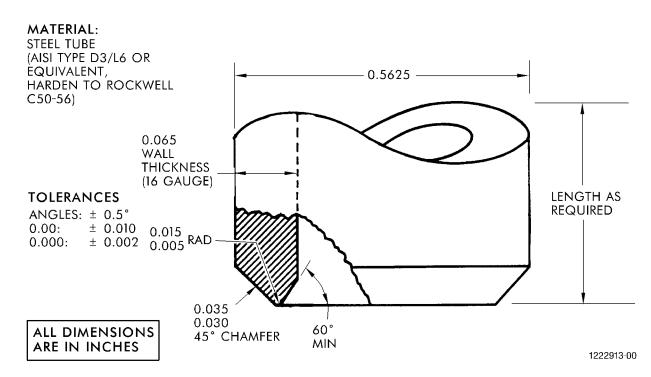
Spherical Bearing Swaging Tool LMT 808
